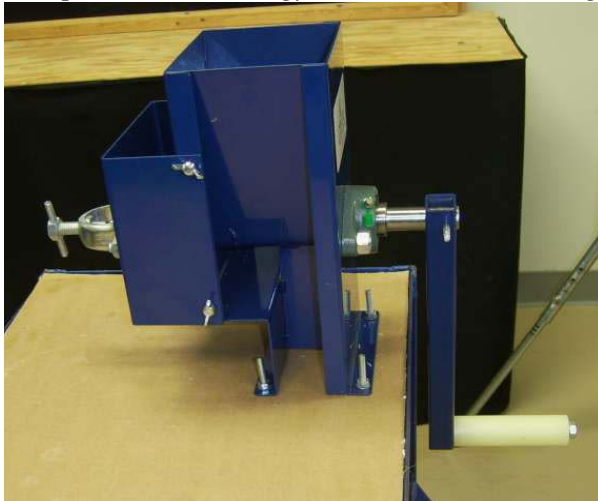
Assembled view of CTI's general-purpose grinder. The hand crank on the right powers the device.
